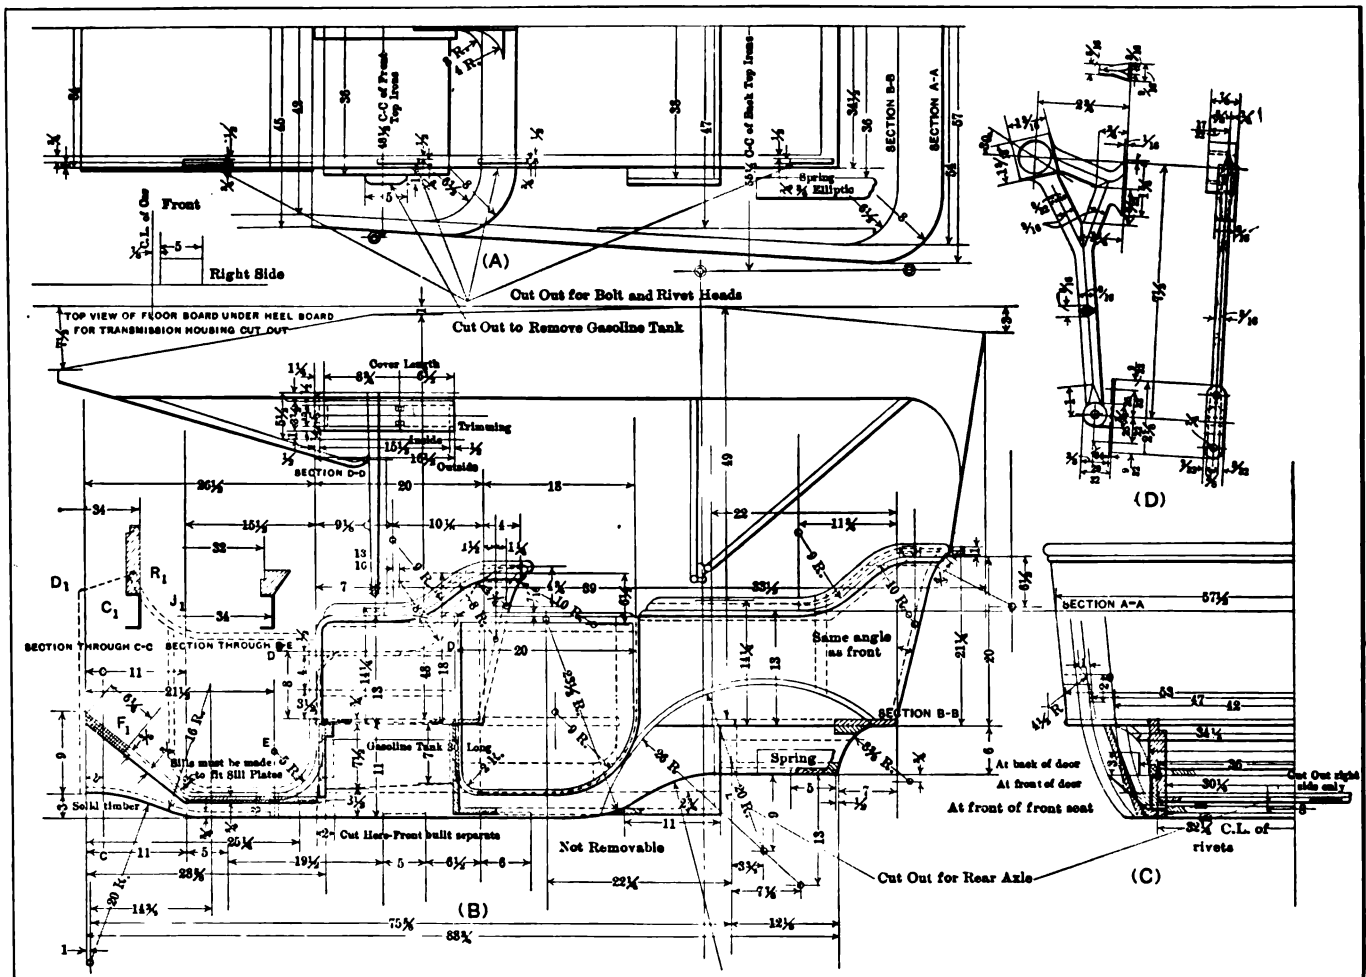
Working drawing of the convertible body, showing means for quickly transforming the same from a touring type to a gunboat
